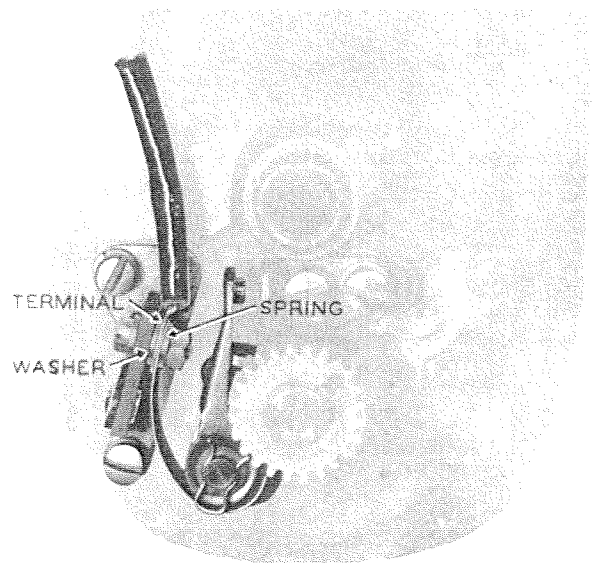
Primary Lead Terminal and Breaker Spring Assembly
